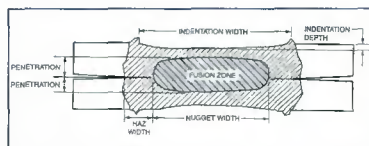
Attributes of a spot weld measured from a section through the center.
